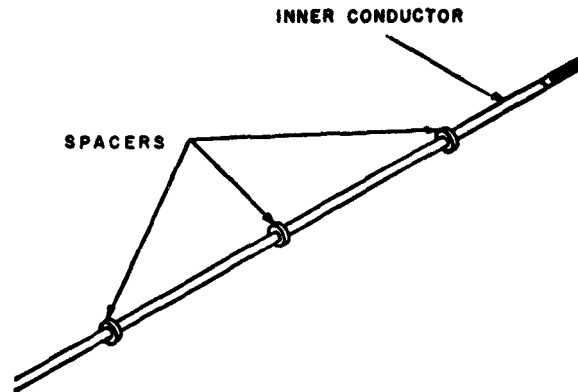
(4). Antenna scanner assembly, disassembly and reassembly (sheet 4 of 5).
